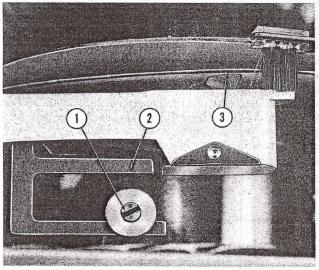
TONE ARM FEED-IN ADJUSTMENT
